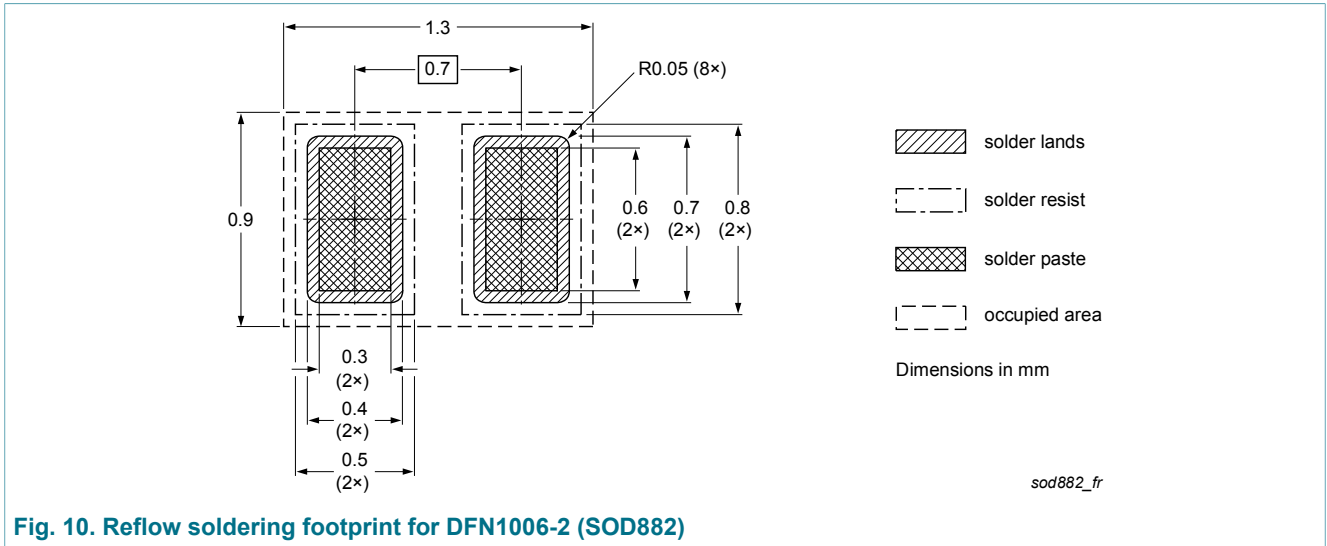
Reflow soldering footprint for DFN1006-2 (SOD882)
